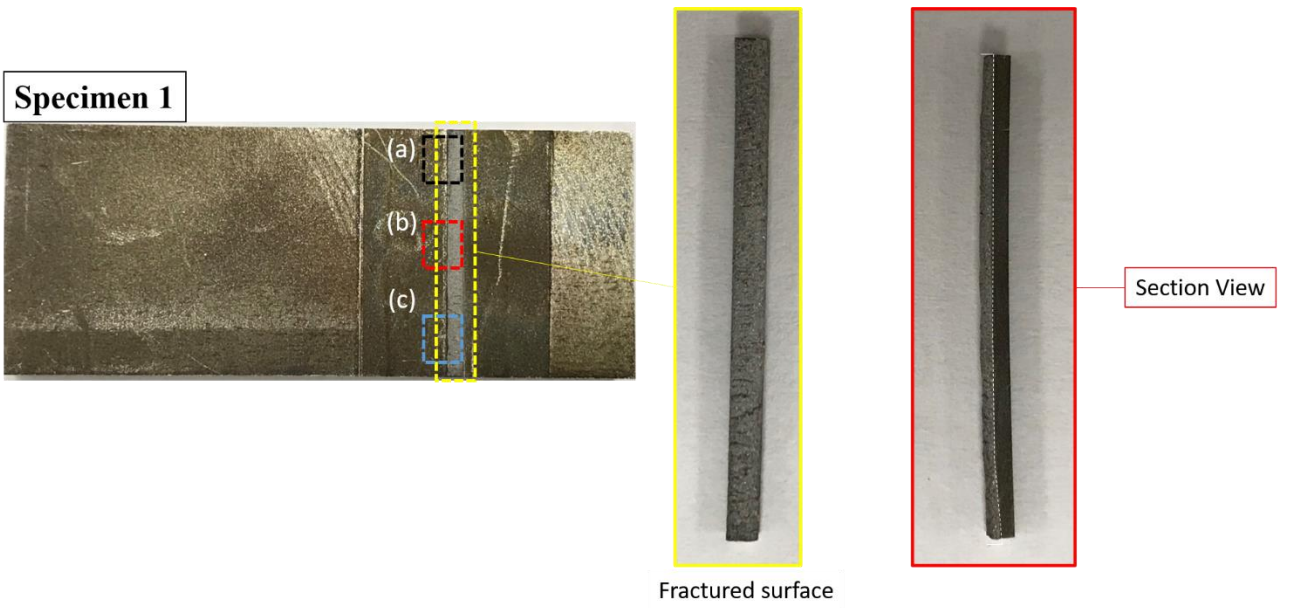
Optical micrographs – fracture surface morphology of shear test specimen (1)
